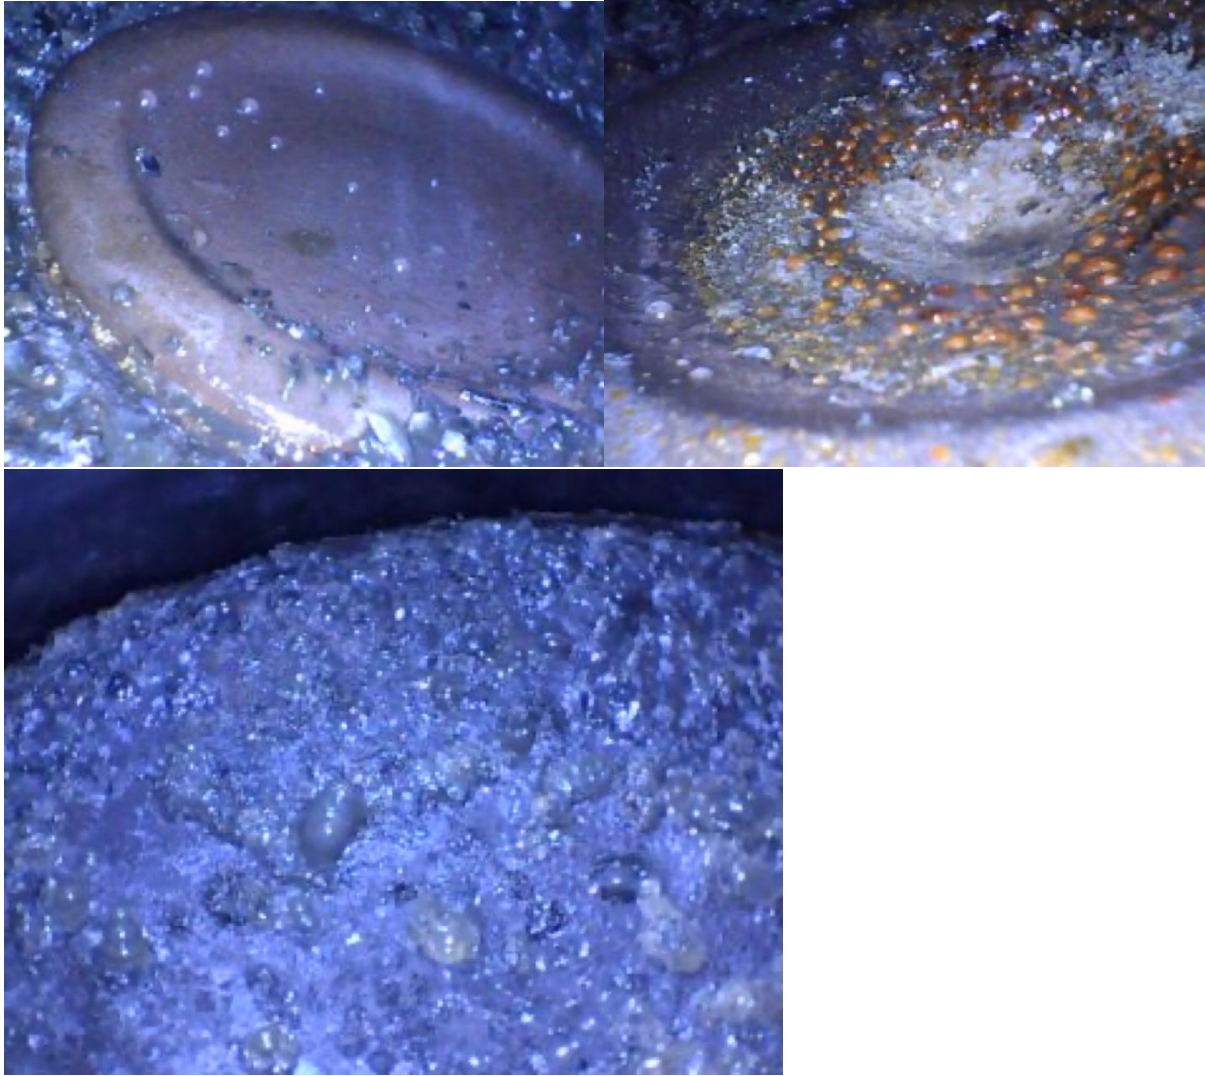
Cylinder No. 2 Intake, Exhaust, and Piston Top
